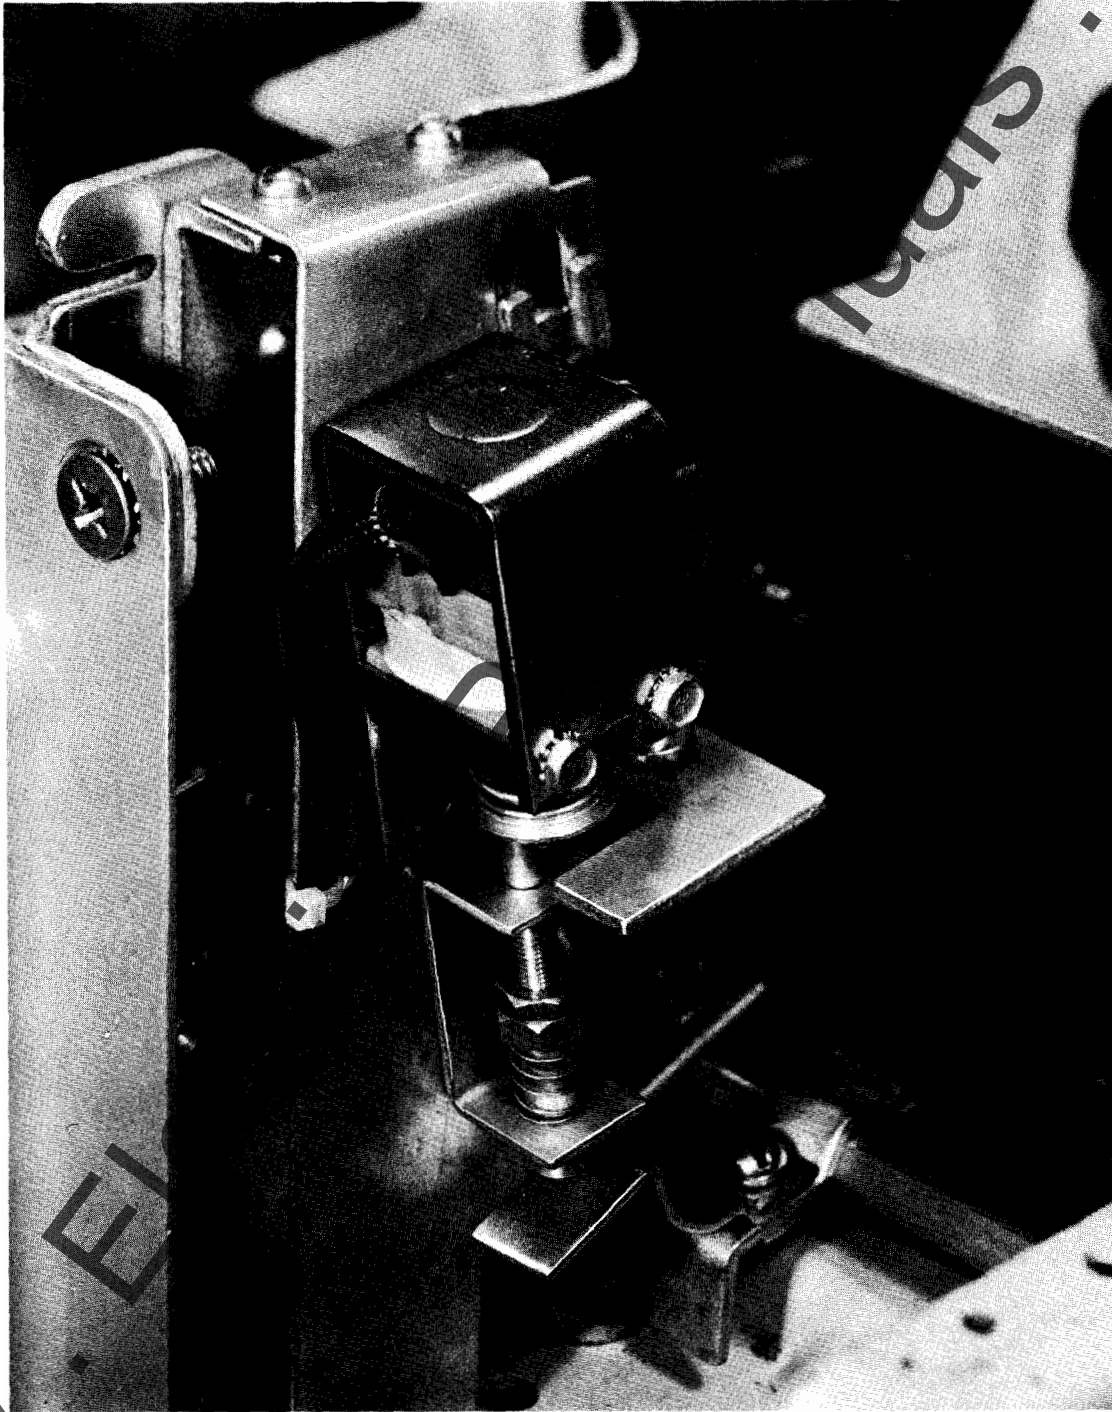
Right side view of operating mechanism showing mounting of flux shift trip device.
